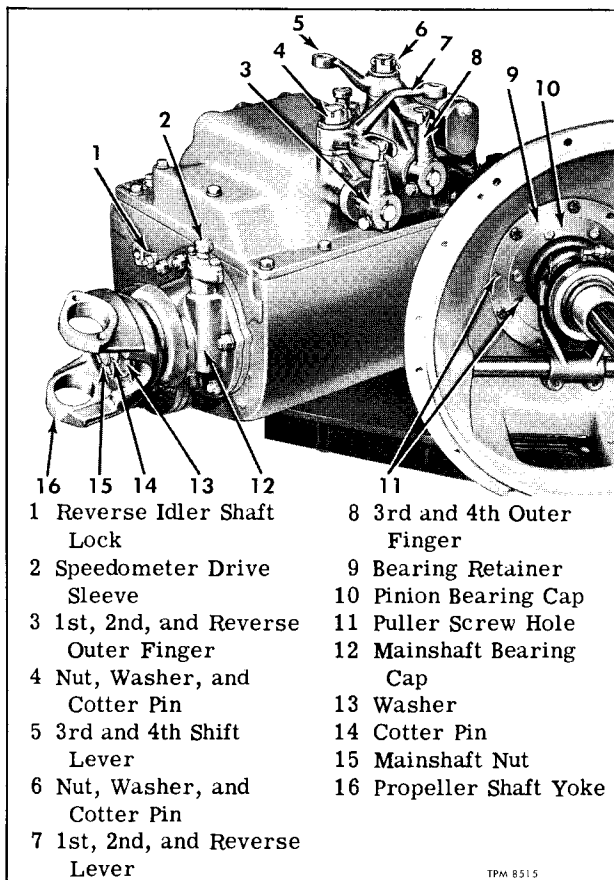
Transmission Showing Shift Levers and Propeller Shaft Yoke
